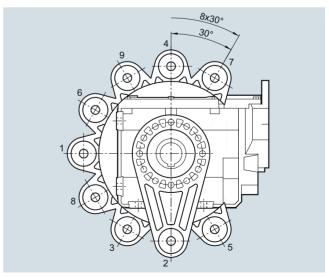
/9 Bevel gearboxes BAD., sizes 39 and 49
